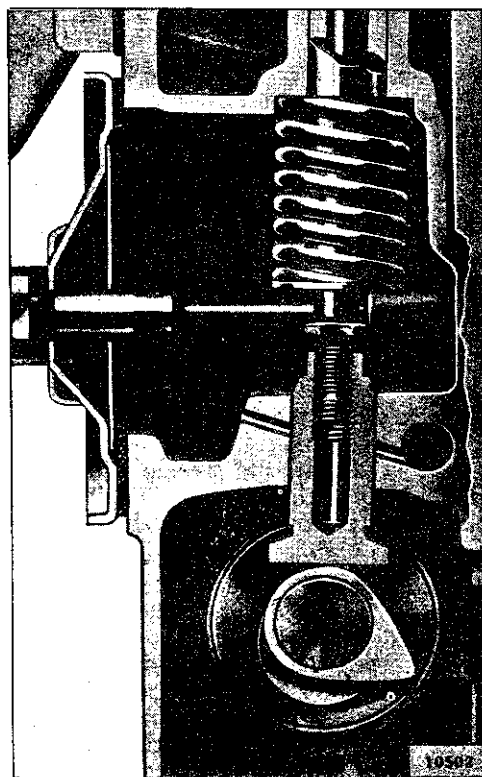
CAMSHAFT, TAPPET AND VALVE
